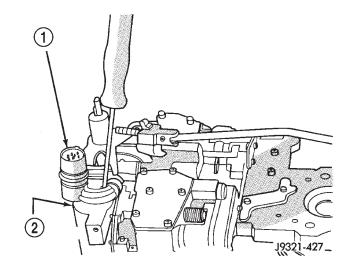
Solenoid Harness Case Connector Shoulder Bolt
